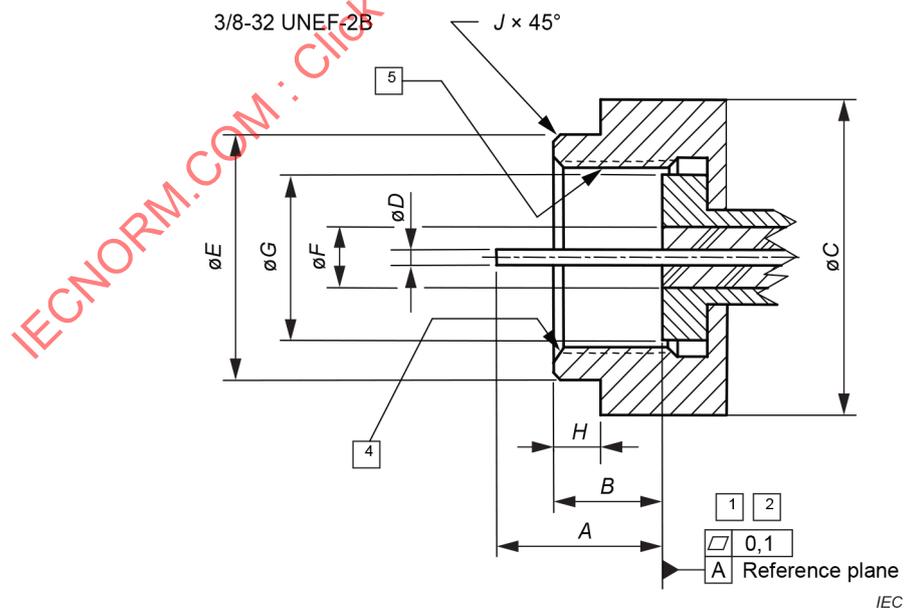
Outdoor “F” type male plug (for dimensions, see Table A.2)
